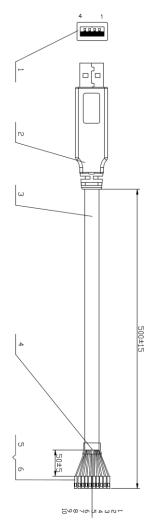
C232HM MPSSE Cable Mechanical Details (dimensions in mm)
